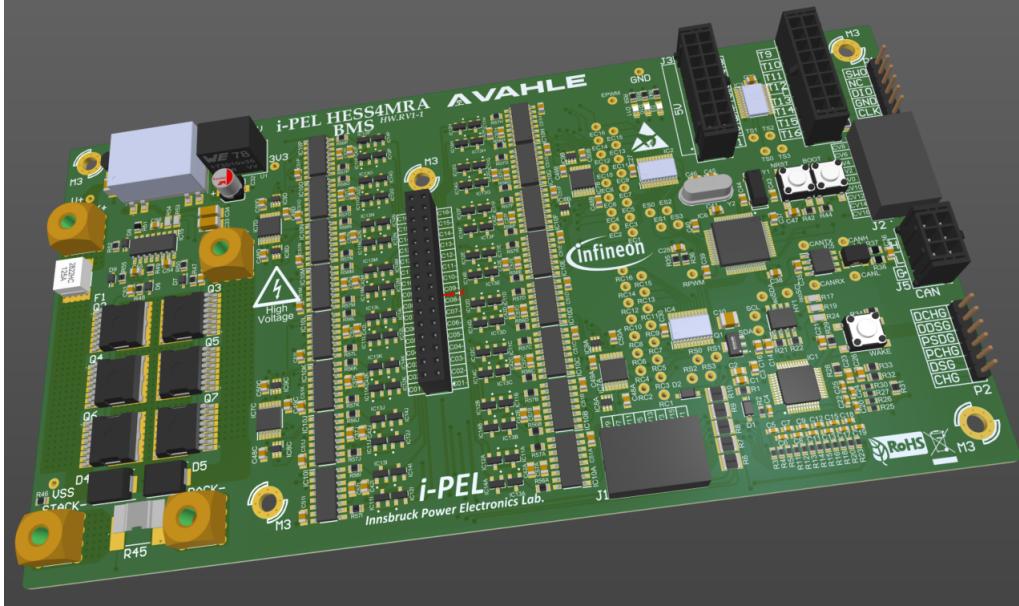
Perspective view on a 3D-model of the Printed Circuit Board (PCB) designed using *ALTIUM DESIGNER 19.0*.
